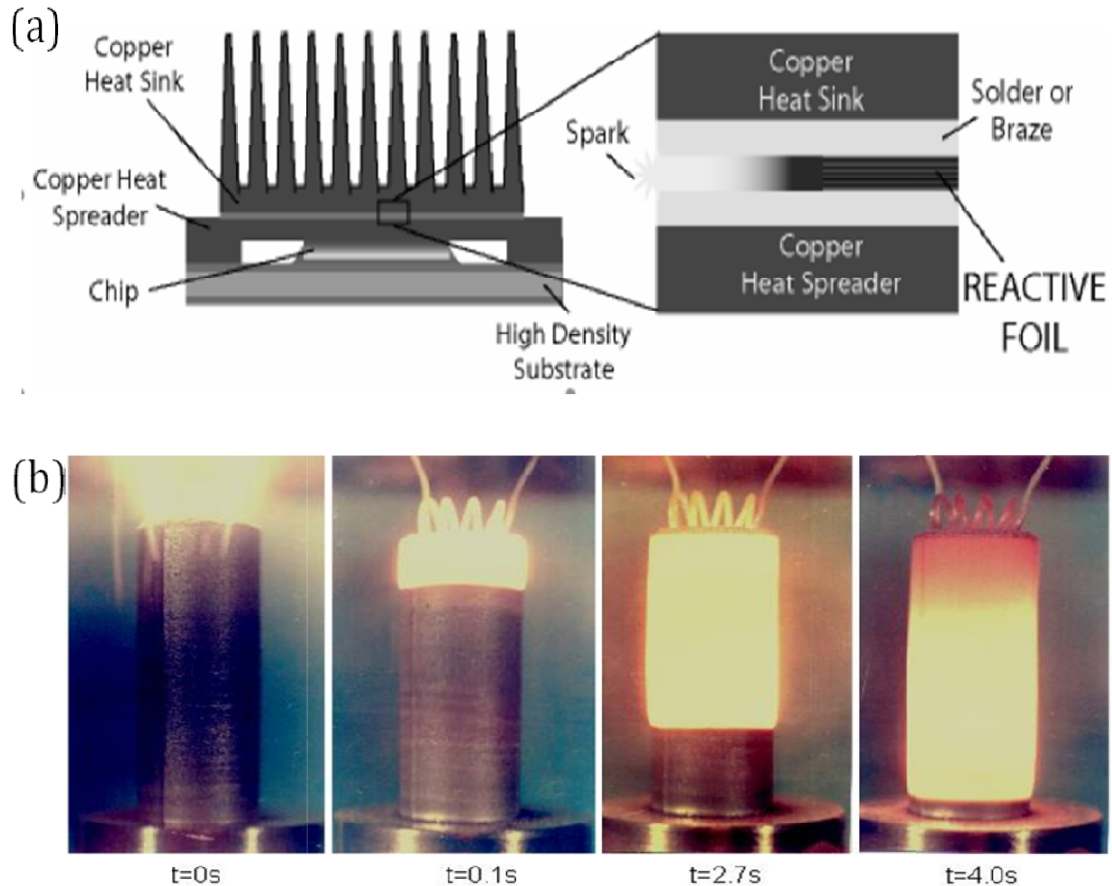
Combustion synthesis being used for (a) melting solder to connect a copper heat sink to a printed circuit board; (b) create SHS disks of TiC [8].
